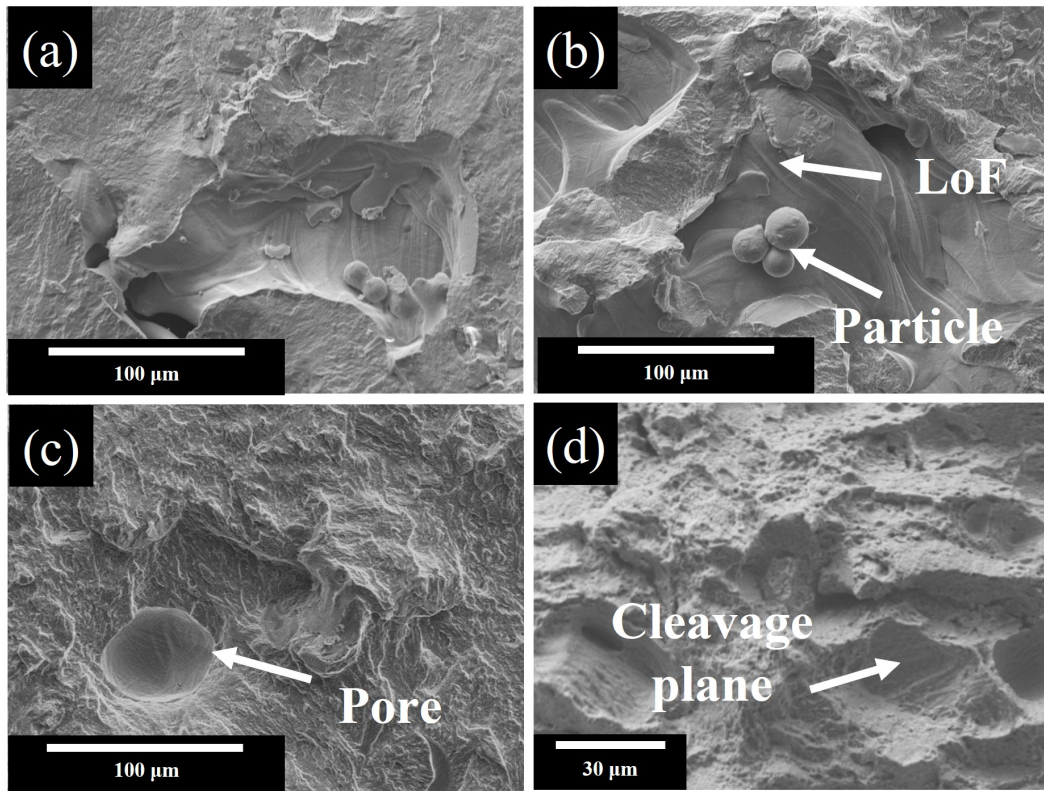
The fractography of final fracture areas for (a) (b) AB and (c) (d) P+AB specimens [132].
